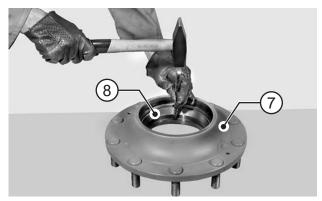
Remove the outer thrust blocks of bearings (8) (16) by driving a pin driver in the slots provided on the hub (7).
